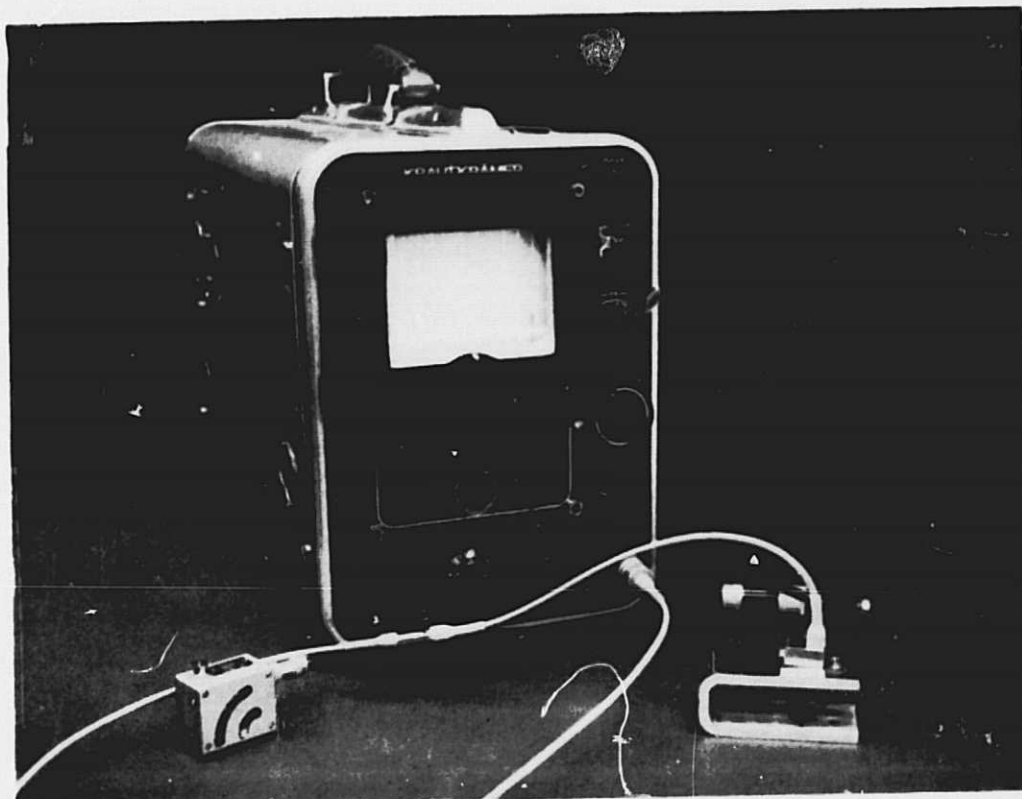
Ultrasonic apparatus used (Krautkrämer), flaw detector type USIP-10W; miniature fixed angle surface wave probe type MOB (positioned on U-bend specimen); and miniature universal variable angle probe type MUWB (on the left)
